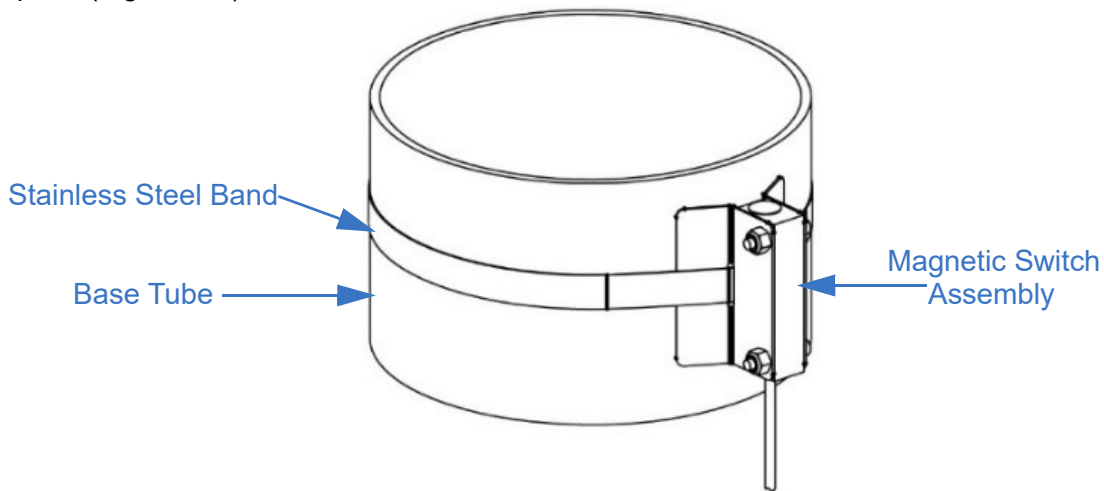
Magnetic Switch Assembly Attached to Base Tube
